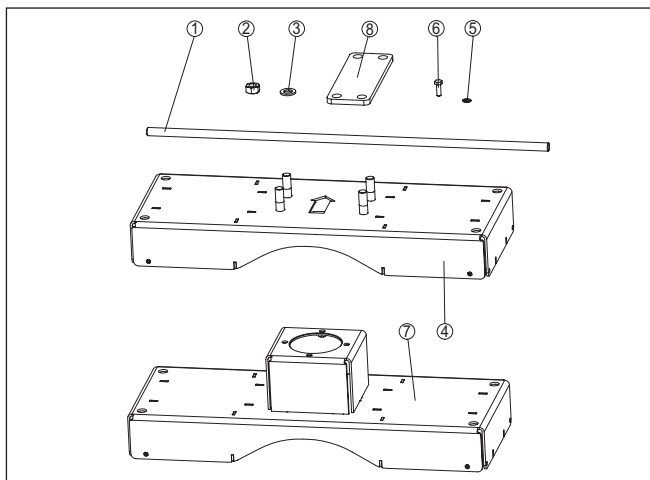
Mounting bracket KV 31 for pipes irradiated at right angles, horizontal sensor mounting
